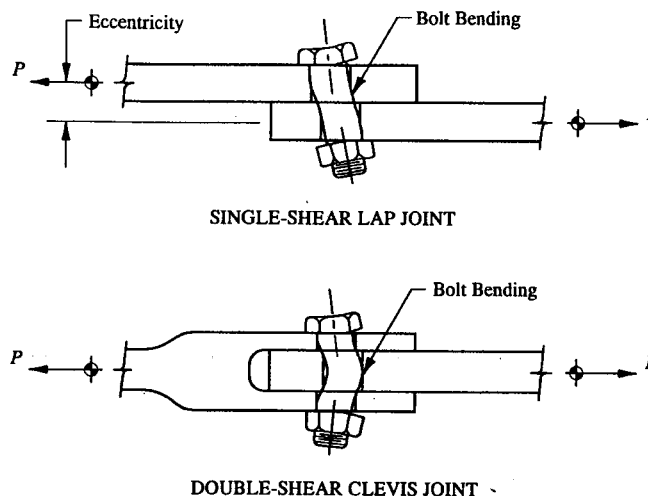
Bolt bending: (a) in a single-shear lap joint and (b) in a double-shear clevis joint.
